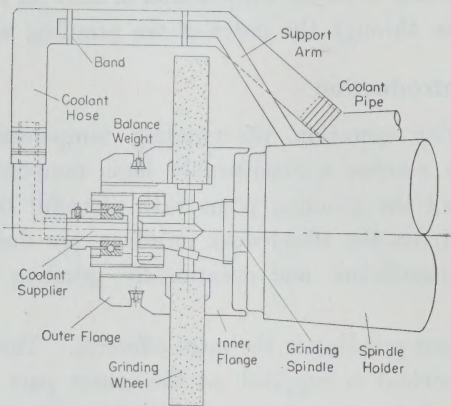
Through Wheel Coolant Grinding Applied to Internal Grinding
